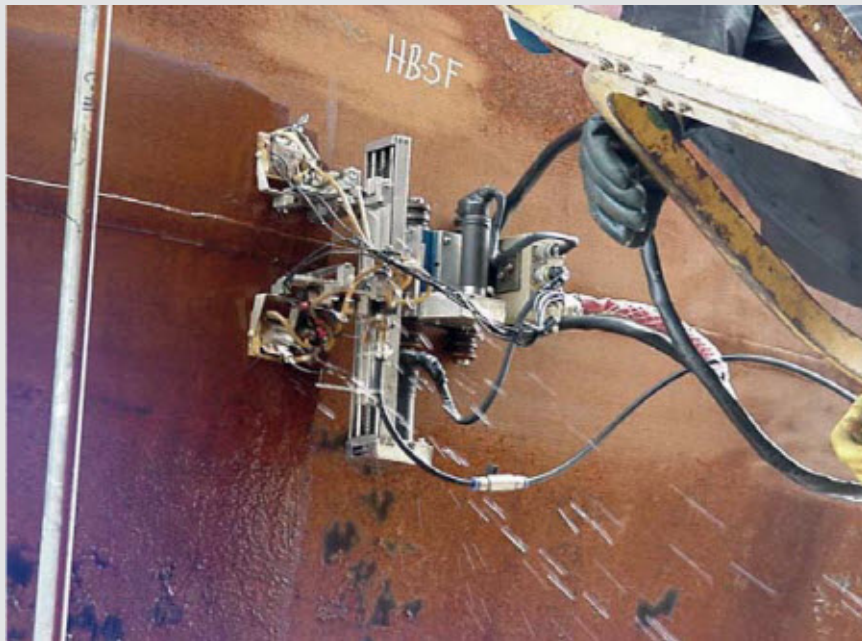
An example of a Crawler performing AUT weld inspection
